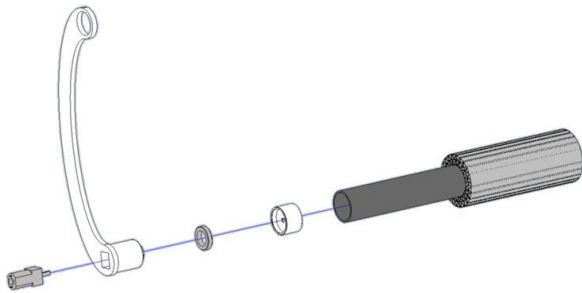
The assembly parts of the roller. From left to right: roller motor, leg with motor holder, bearing, adaptation for the carbon tube, carbon tube, roller cover.
